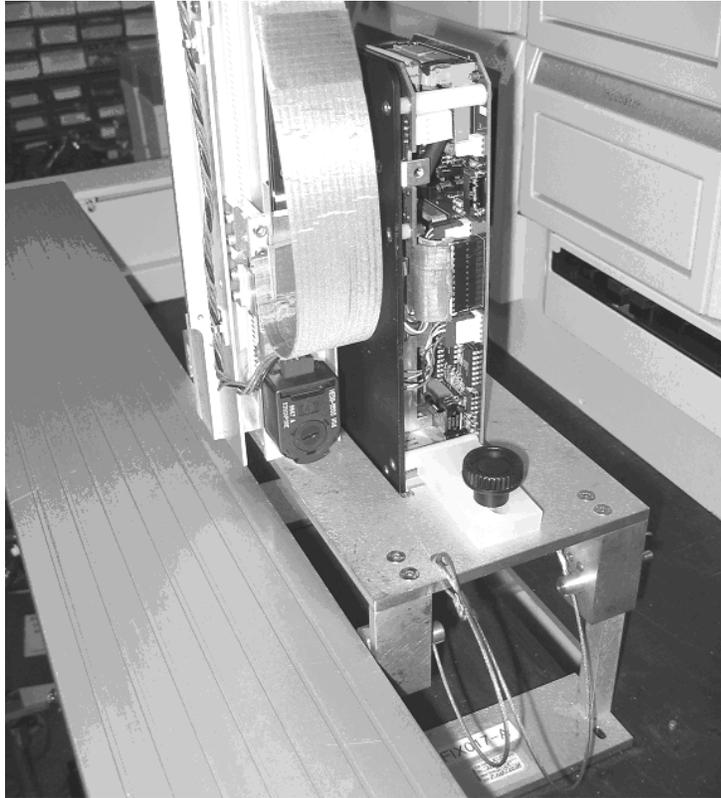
Mounting the Pipette on the PMFIX017-A Jig
